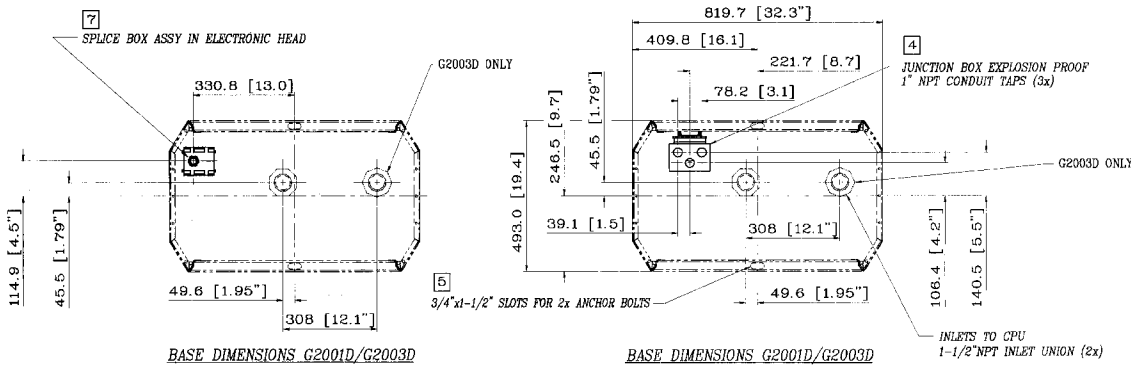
63-7133-C Installation Instruction - Global Century Suction Models.
